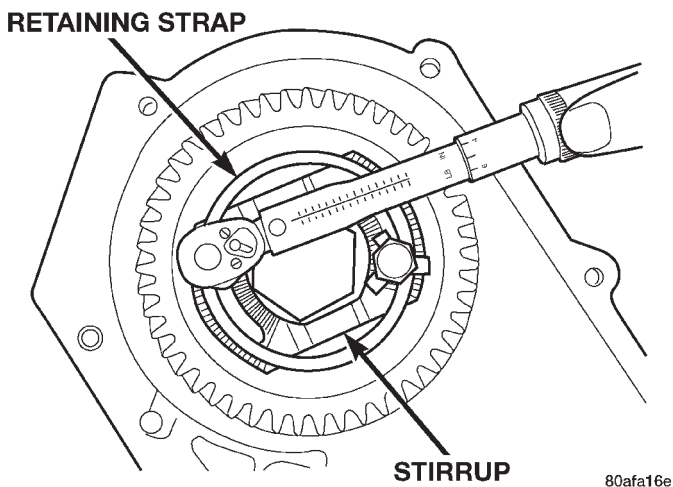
Tighten Stirrup Strap Bolts To 23 N-m (200 in. lbs.)
